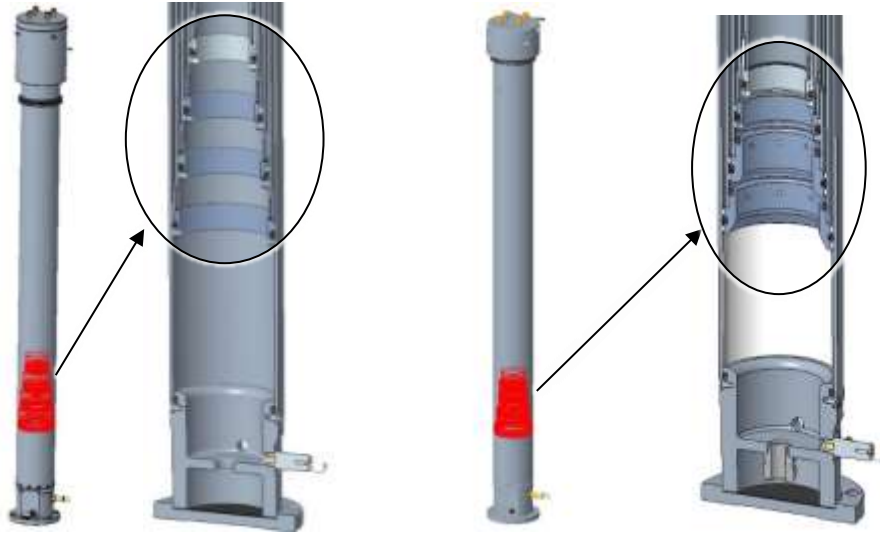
Examples of threaded (left) and hybrid (right) piston fixing systems
